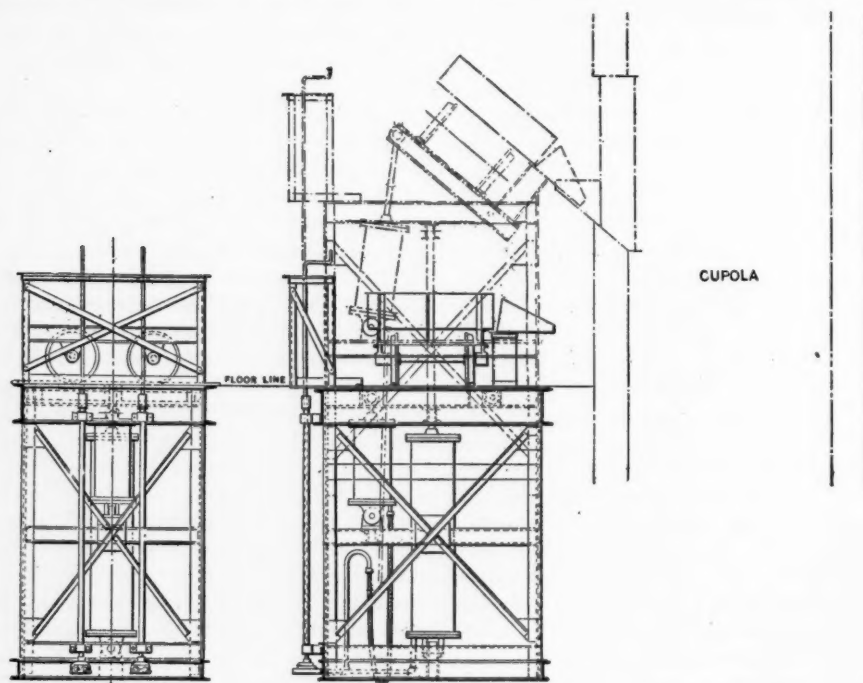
FRONT AND SIDE ELEVATIONS OF A COMPOUND CUPOLA CHARGING MACHINE ARRANGED TO ELEVATE CAR BEFORE DUMPING.
